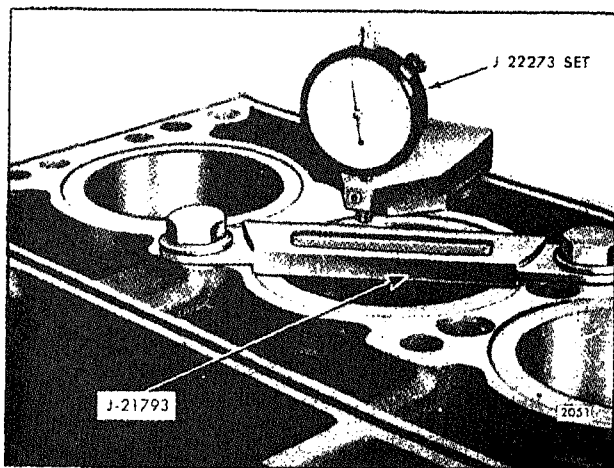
Checking Distance of Liner Flange Below Top Face of Block
